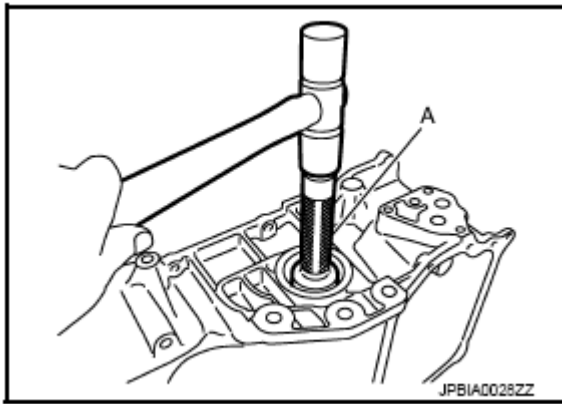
Removing Axle Pipe From Oil Pan (Upper) Using Drift
